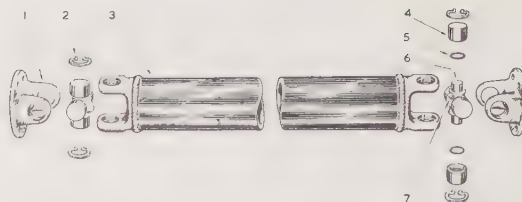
11 Propeller shaft as fitted to earlier cars, non-telescopic type.
